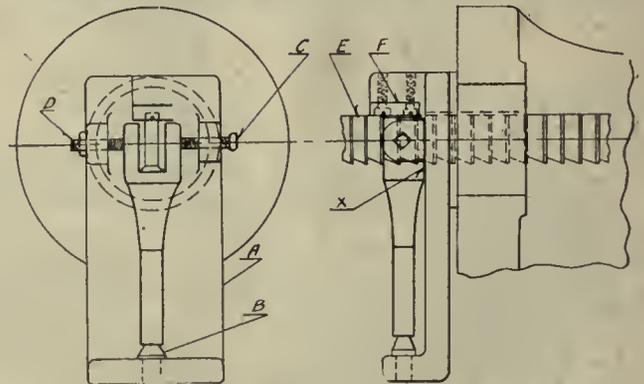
FIXTURE FOR BROACHING LINK CONNECTION.
